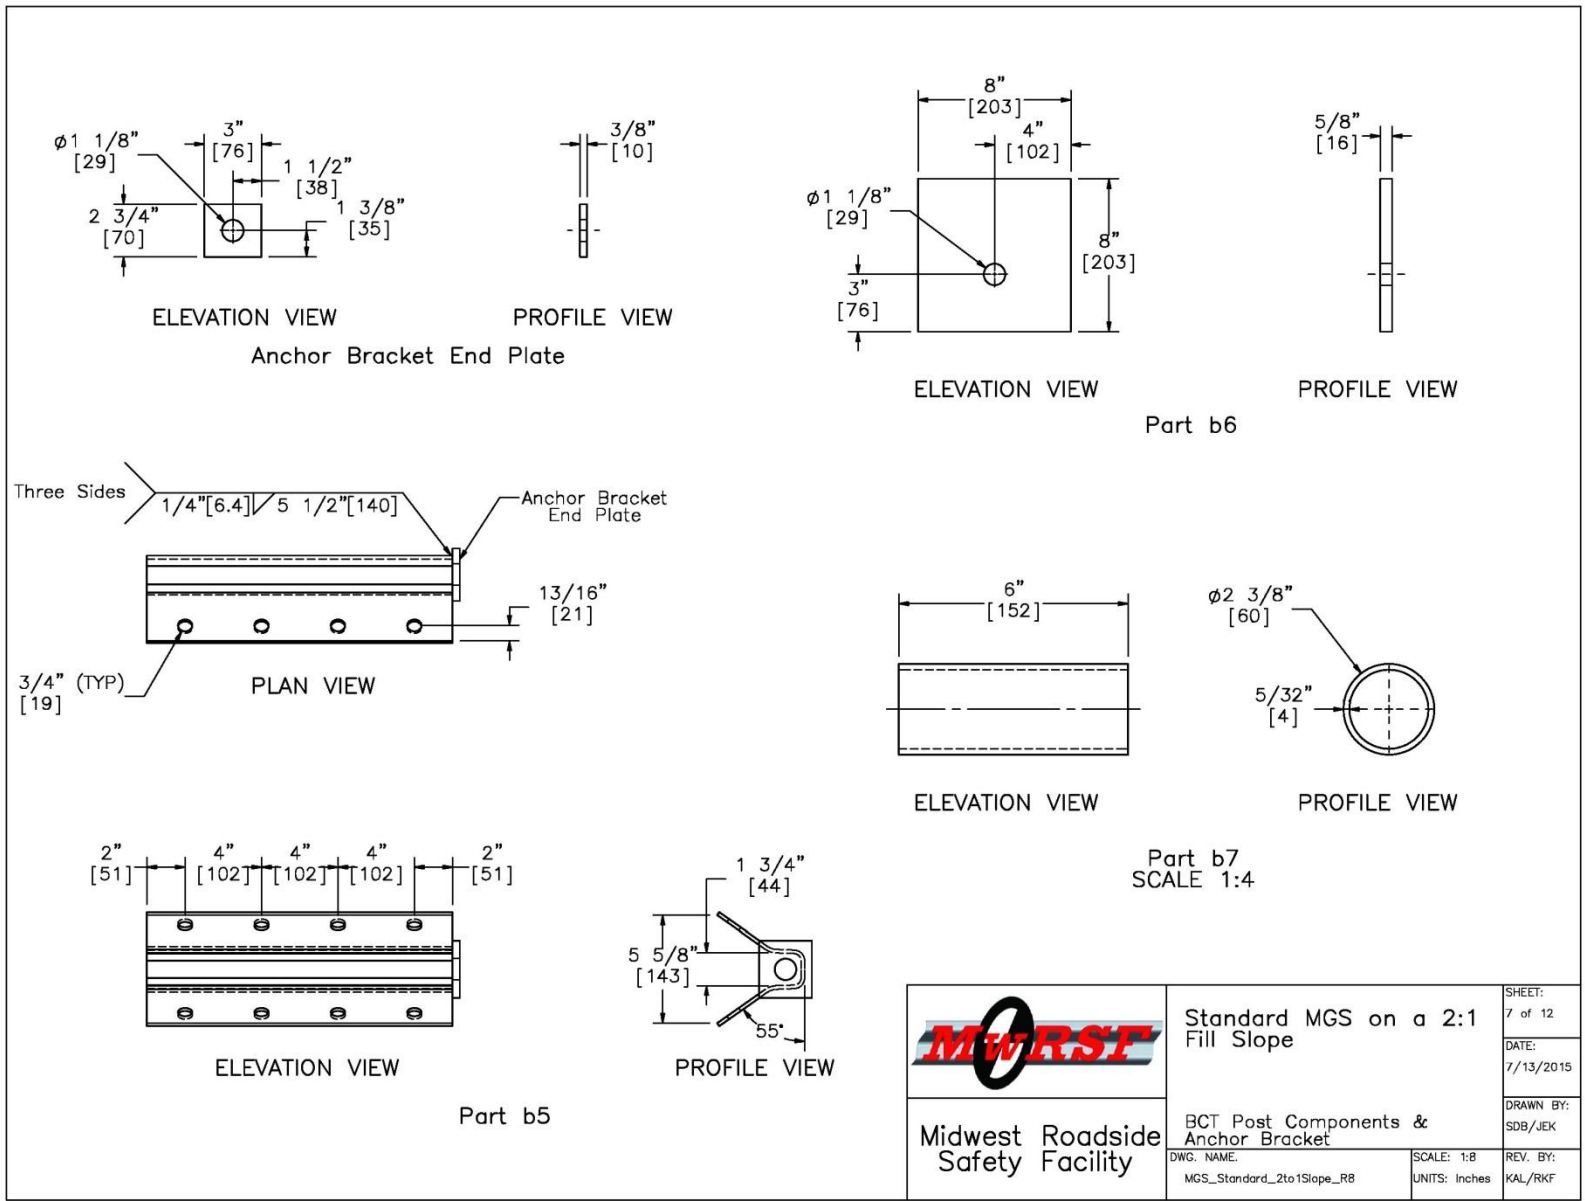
BCT Post Components and Anchor Bracket, Test No. MGSS-1
